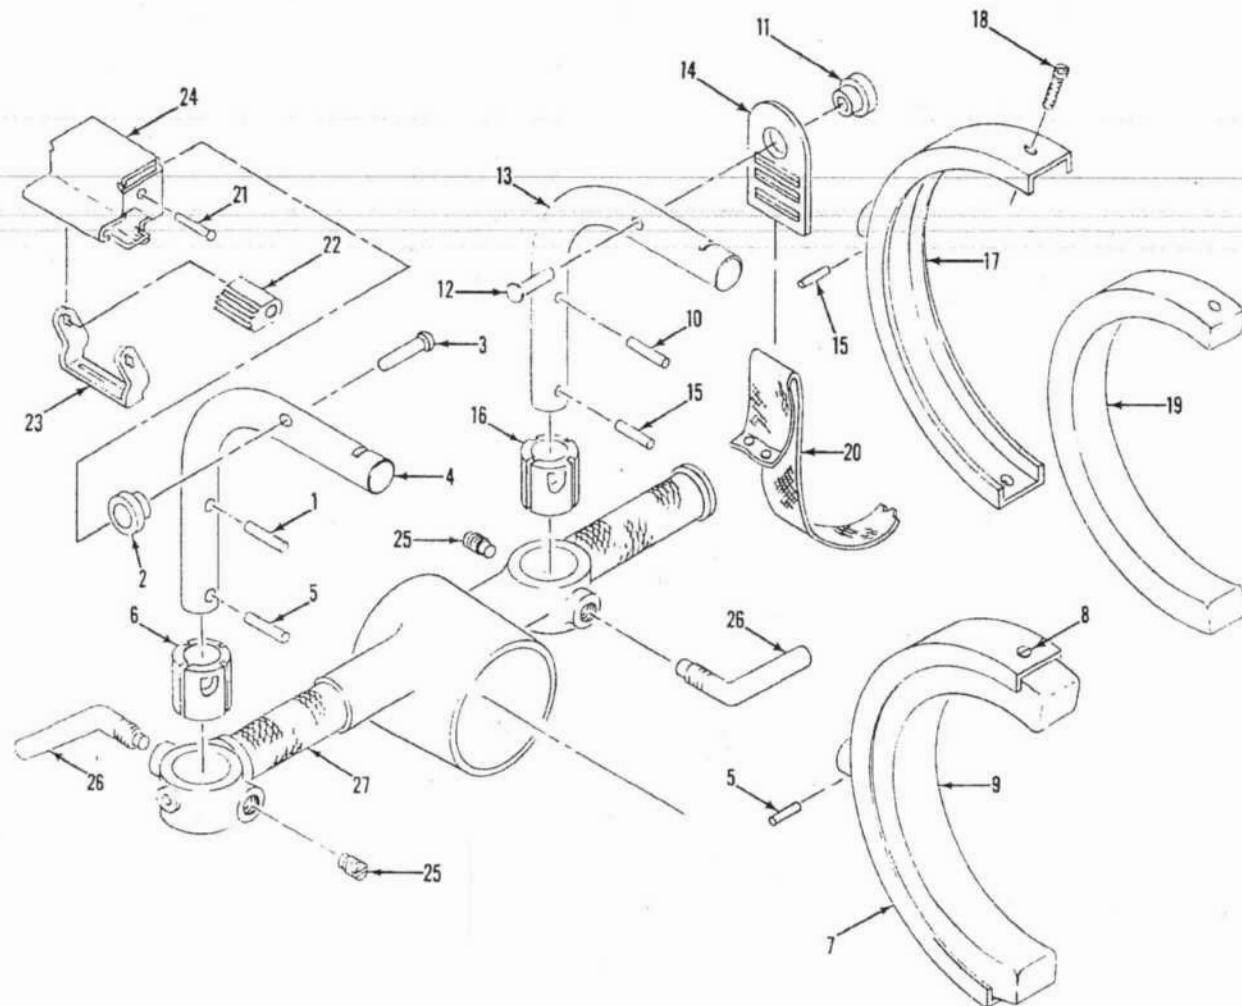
20 MM Shoulder Rest and Hand Grips (MK 5 MOD 0)
